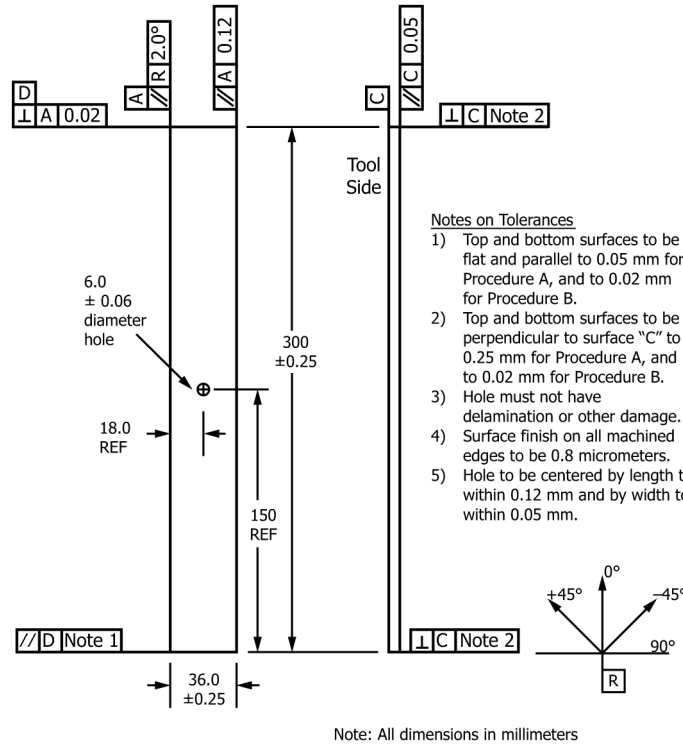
Open Hole Compression Test Specimen (SI Version)
